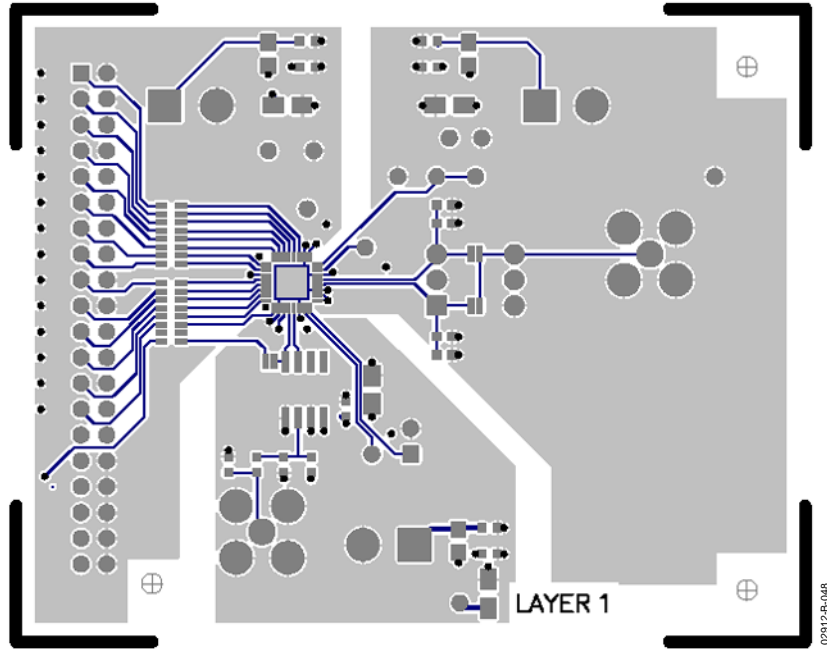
LFCSP Evaluation Board Layout—Primary Side
